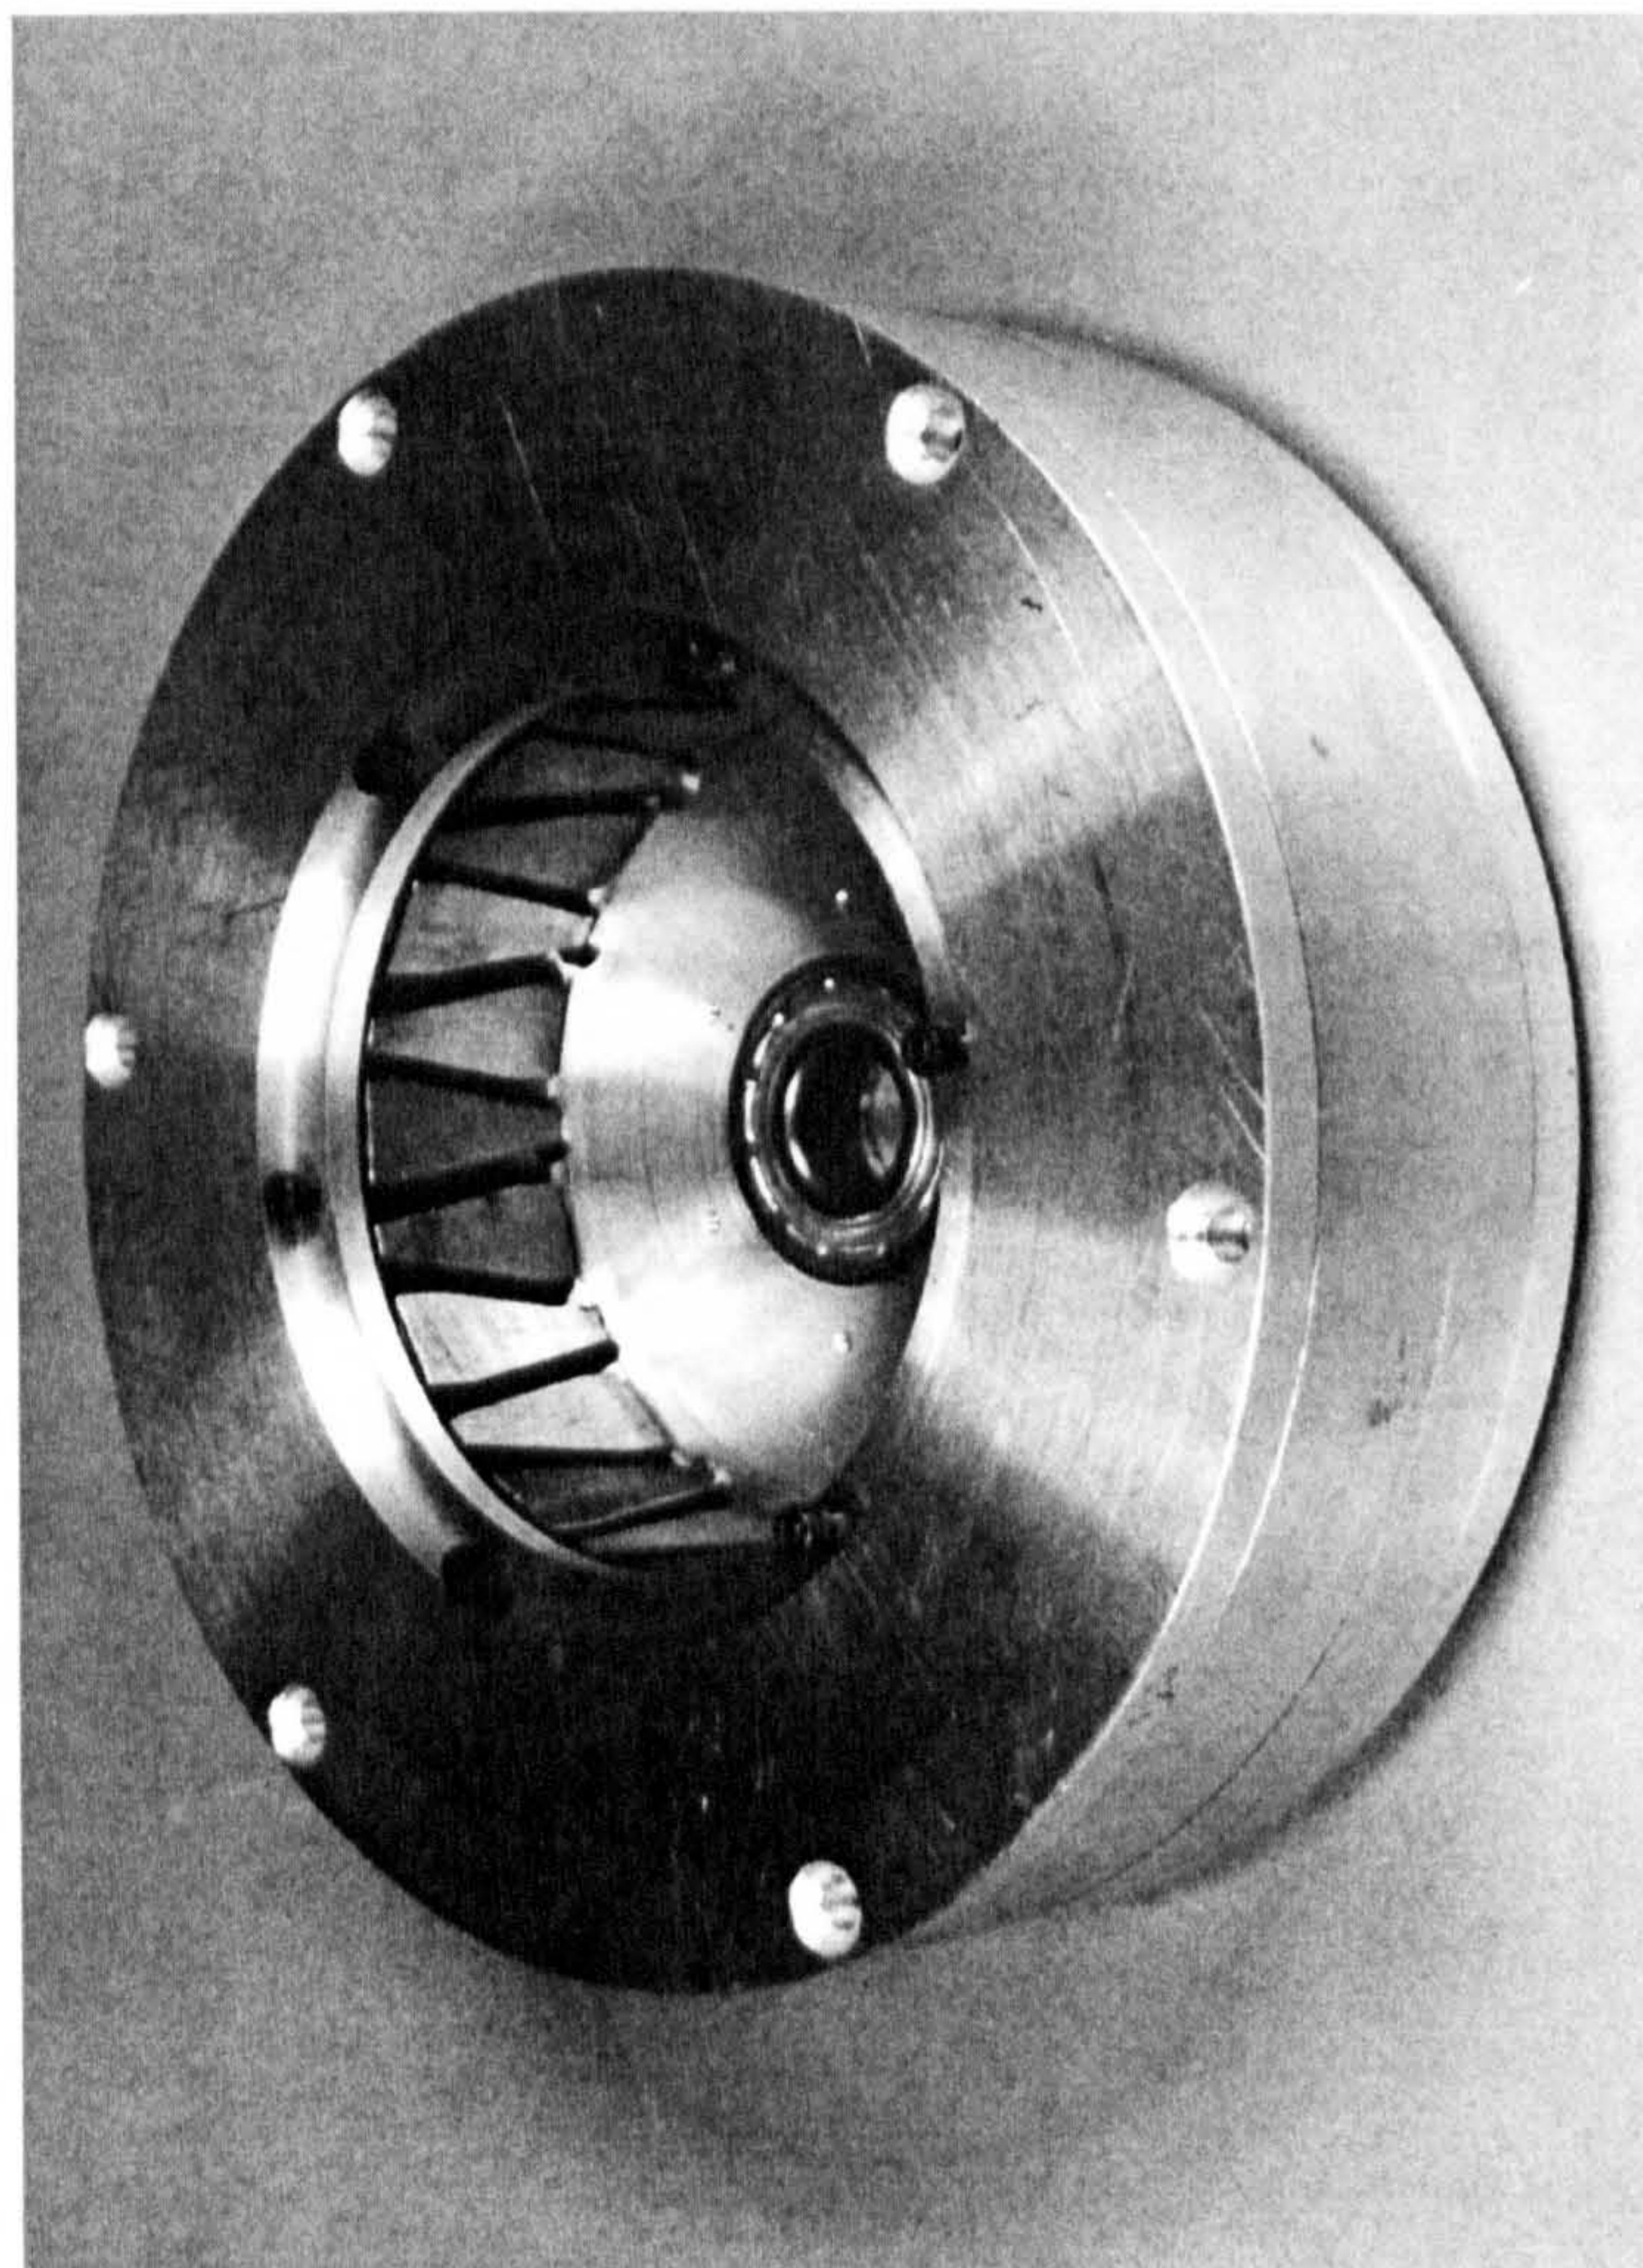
Assembled stator illustrating the interleaved claw teeth
